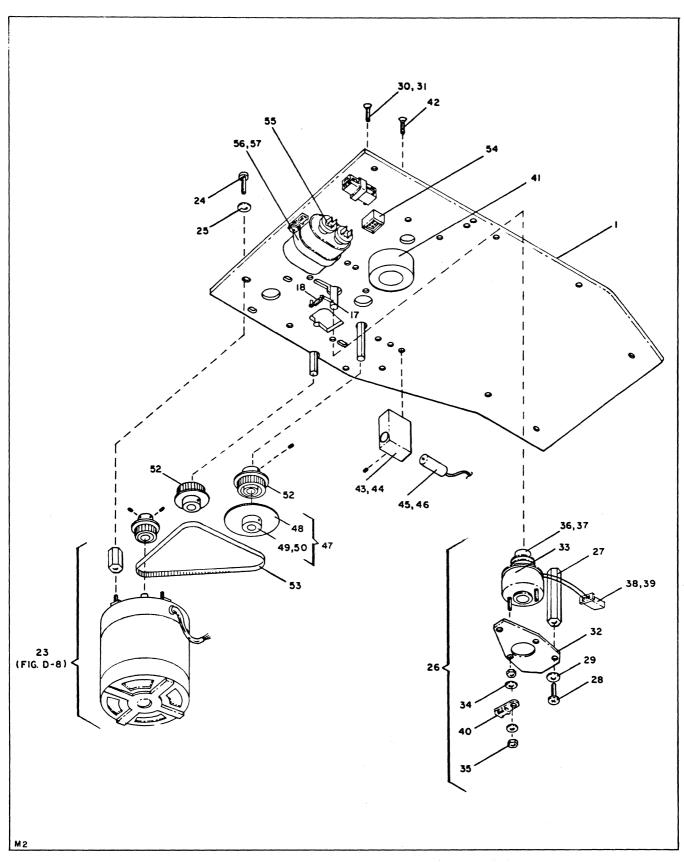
MAIN PLATE ASSEMBLY (Sheet 2 of 2)
